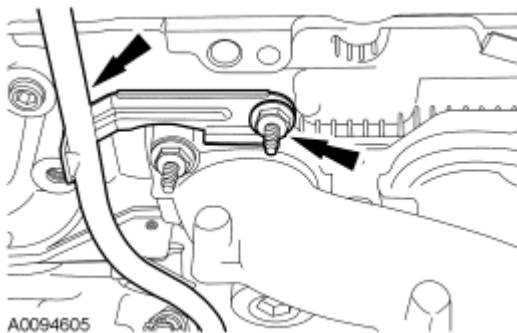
Locating Oil Level Indicator Tube & Stud Bolt
